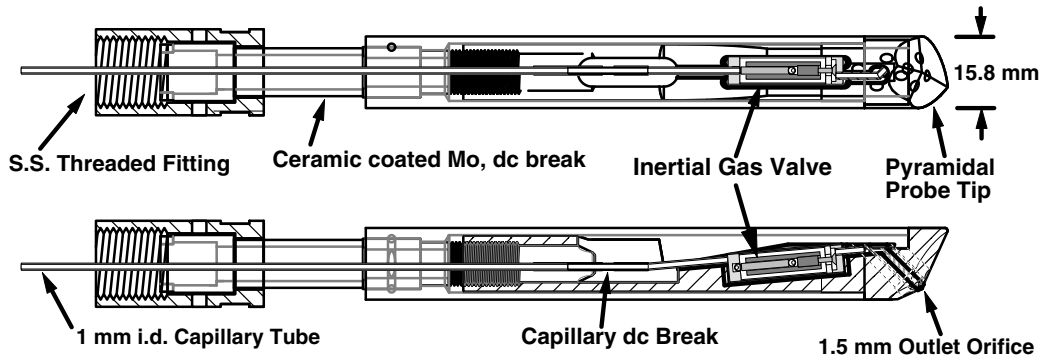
Transparent view of fast-scanning probe head assembly showing gas feed and inertial valve location.
